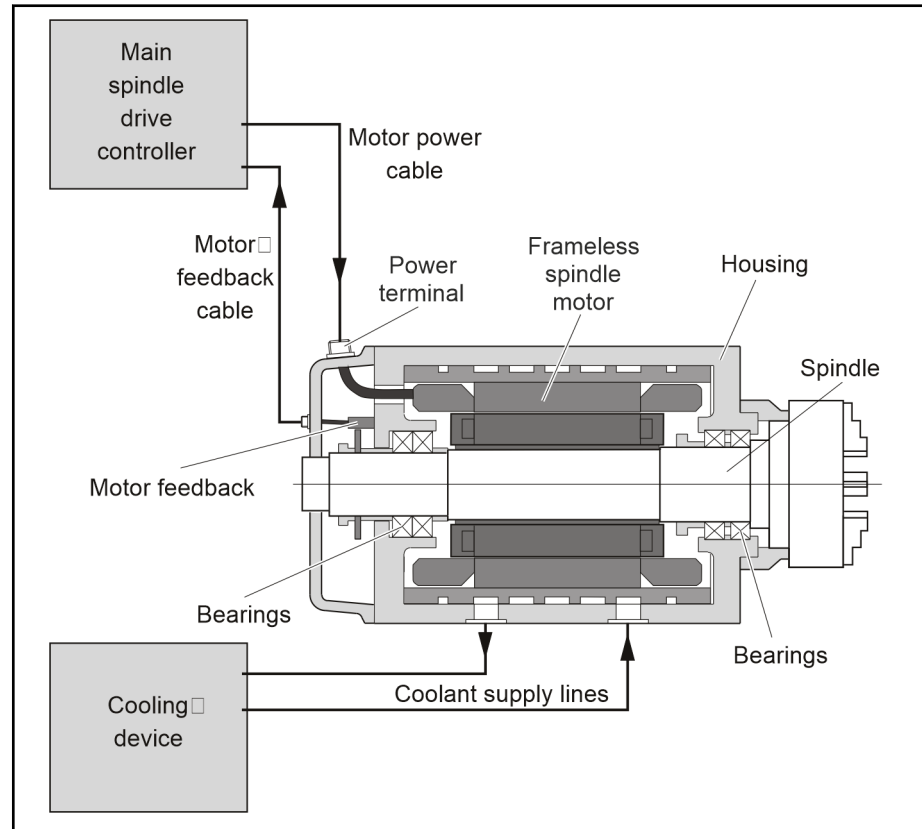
Components of the AC main spindle drive with kit spindle motor 1MB
